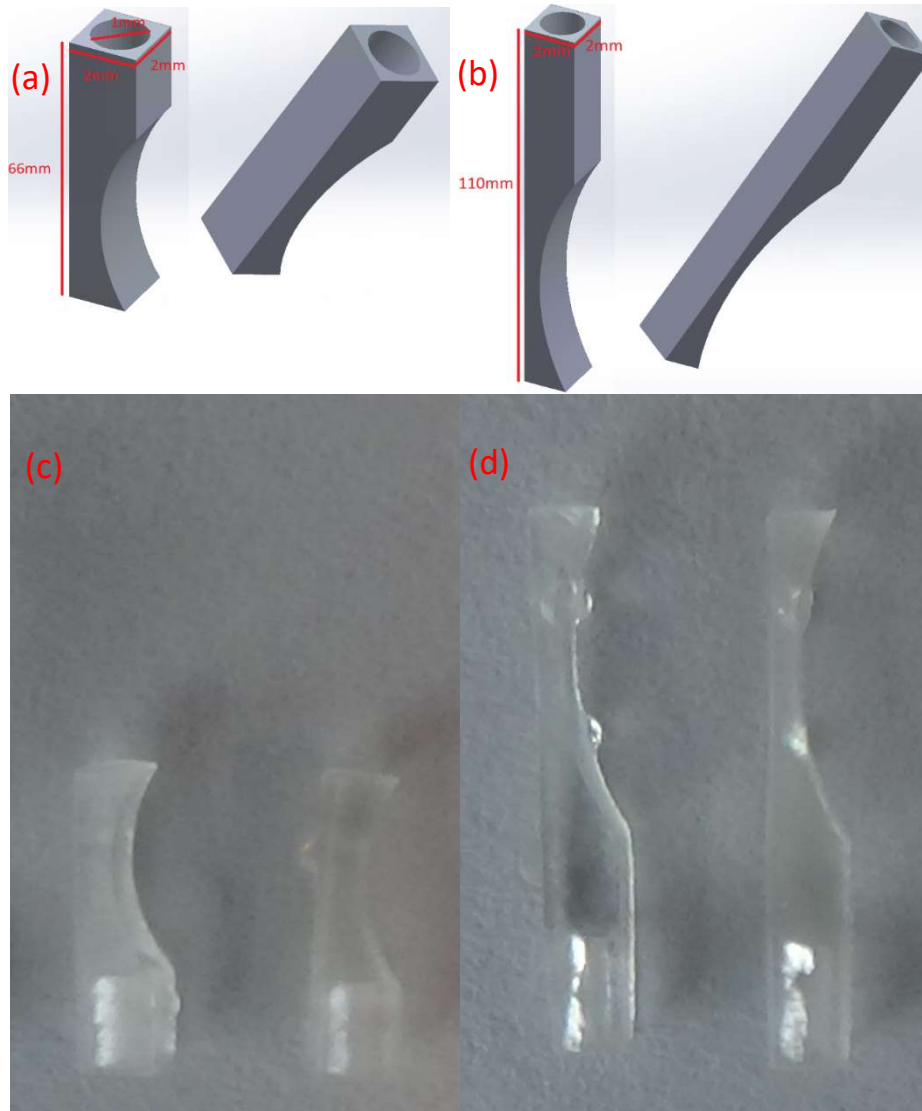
3D design of fingers with Solidworks and the real 3D printed ones. (a) Short finger schematic design and its dimensions. (b) Long finger schematic design and its dimensions. (c) 3D printed short fingers printed by Form-2 3D printer developed by Formlabs. (d) 3D printed long fingers printed by Form-2 3D printer developed by Formlabs.
